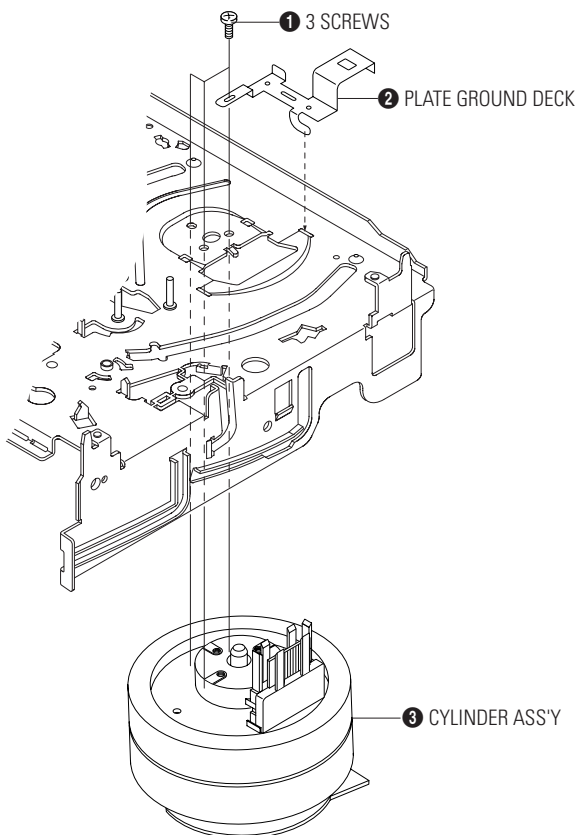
Plate Ground Deck, Cylinder Ass'y Removal
